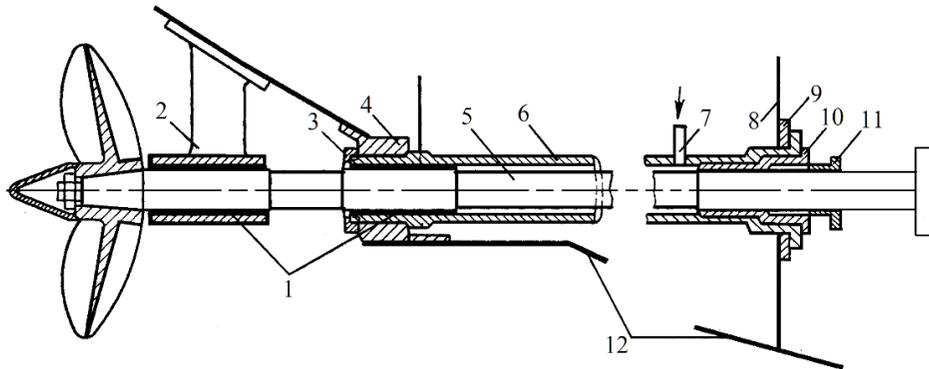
Construction of a Shaft Tube [Authors, 4]
